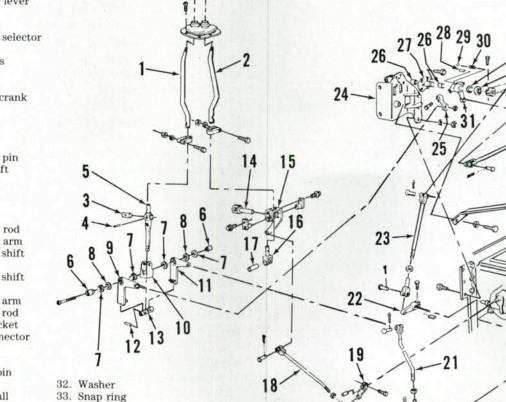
View of assembled shift mechanism. Refer to Fig. 200 for legend.
